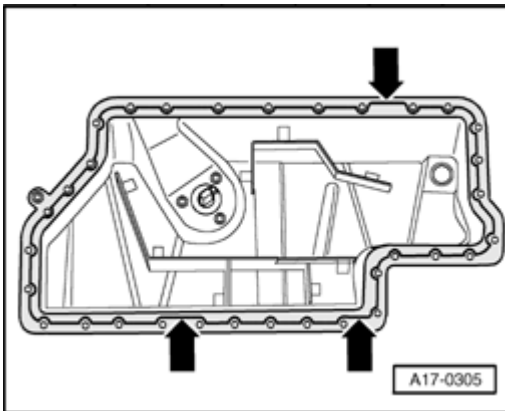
Applying Sealant Bead On Clean Sealing Surface Of Lower Section Of Oil Pan
